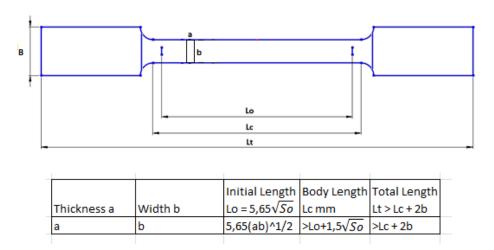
Greater than 3 mm from the tensile test specimens with dimensions of flat materials
